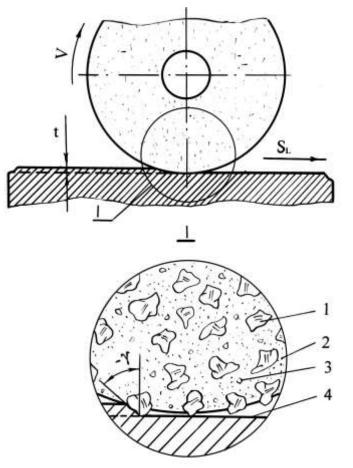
Cutting by grinding tool: 1 – abrasive grain; 2 – bond (matrix); 3 – pore; 4 – blank
